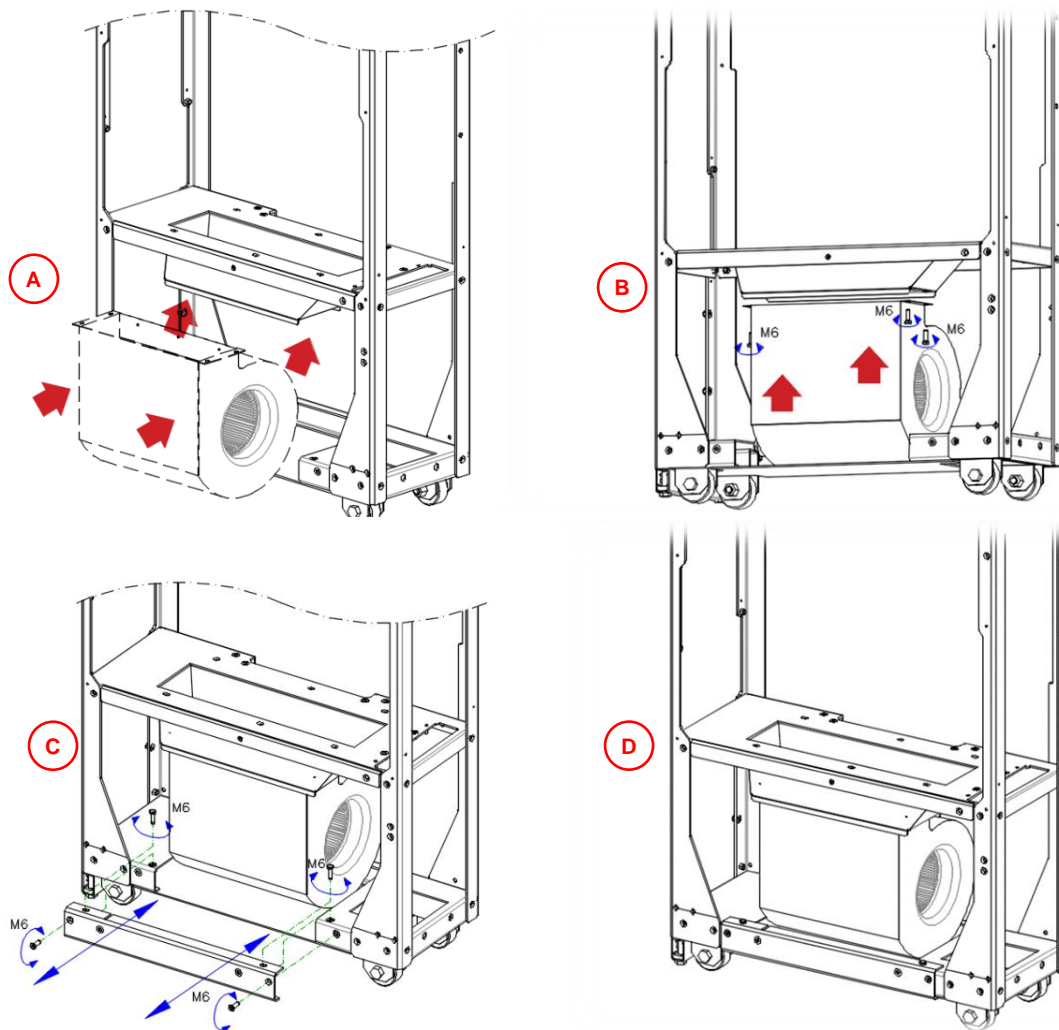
Cooling fan for SDx.2 frame – Replace/Mounting steps
